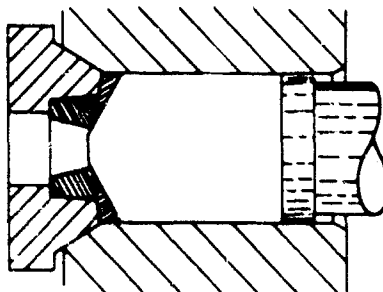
Extrusion of a cylindrical billet with a conical leading face [3].
